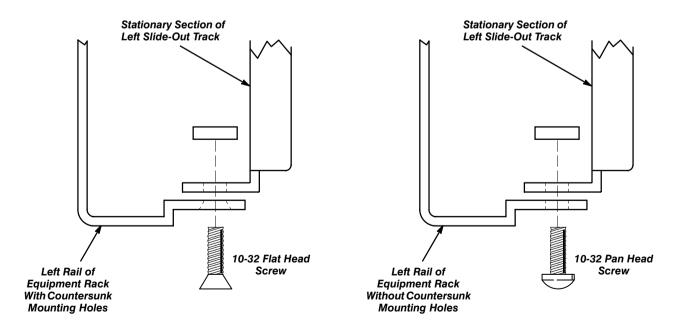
Attaching the Slide-Out Tracks Behind the Equipment Rack Rails
